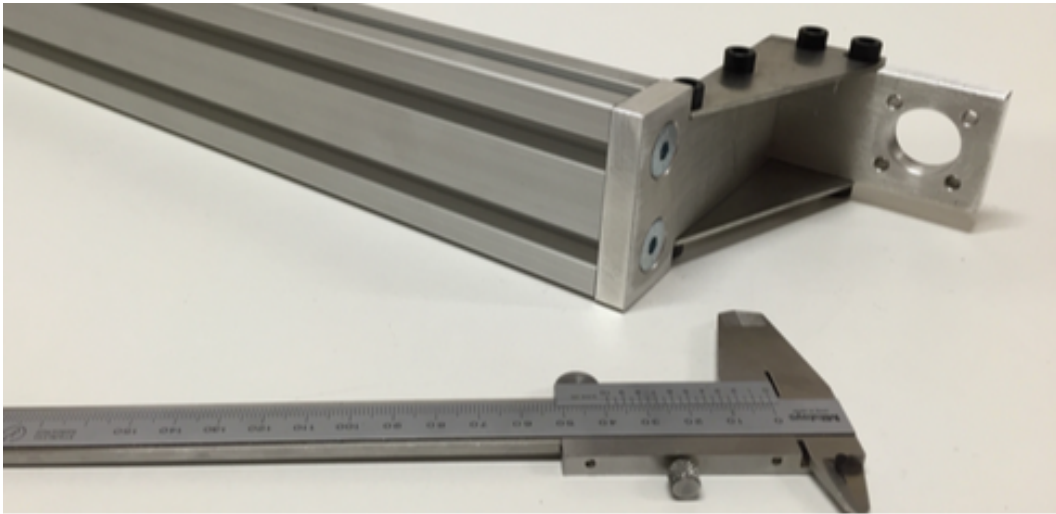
Link 3* assembly, detail of the shaft-link interface. No shaft holder installed.
